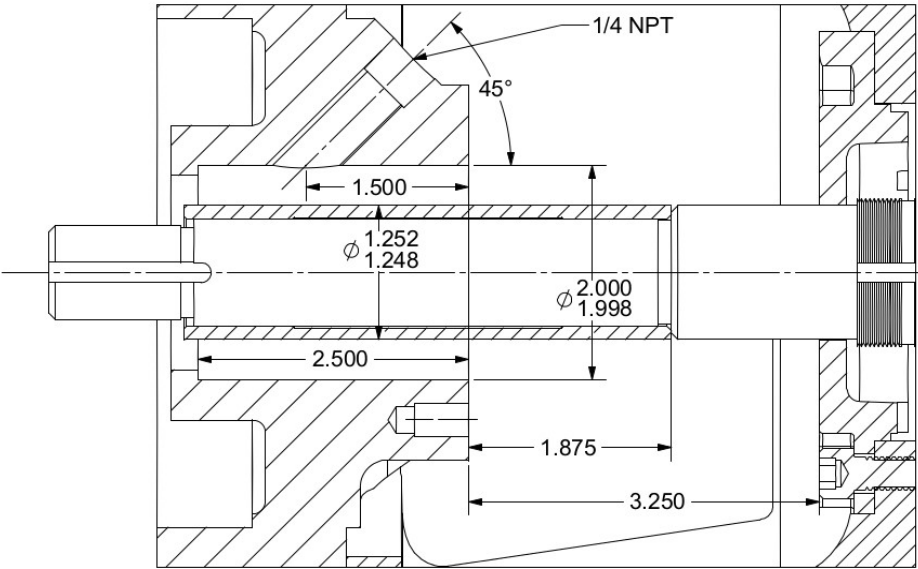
Stuffing Box 10P Bearing Frame, Keyed Version Shown
